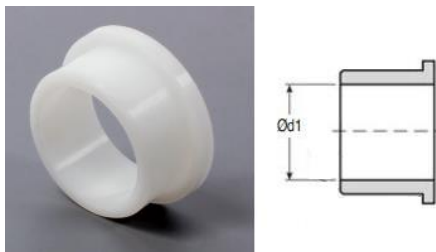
Chosen plain bearing with an inner diameter (d1) of 8 mm (HPC, 2020).
